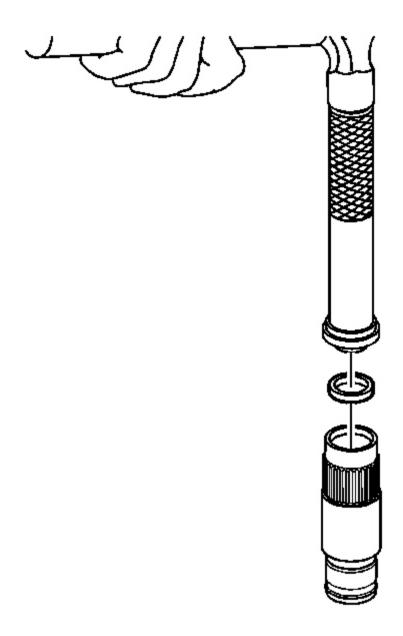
Installing Cup Plug In Front Output Shaft Courtesy of GENERAL MOTORS CORP.
